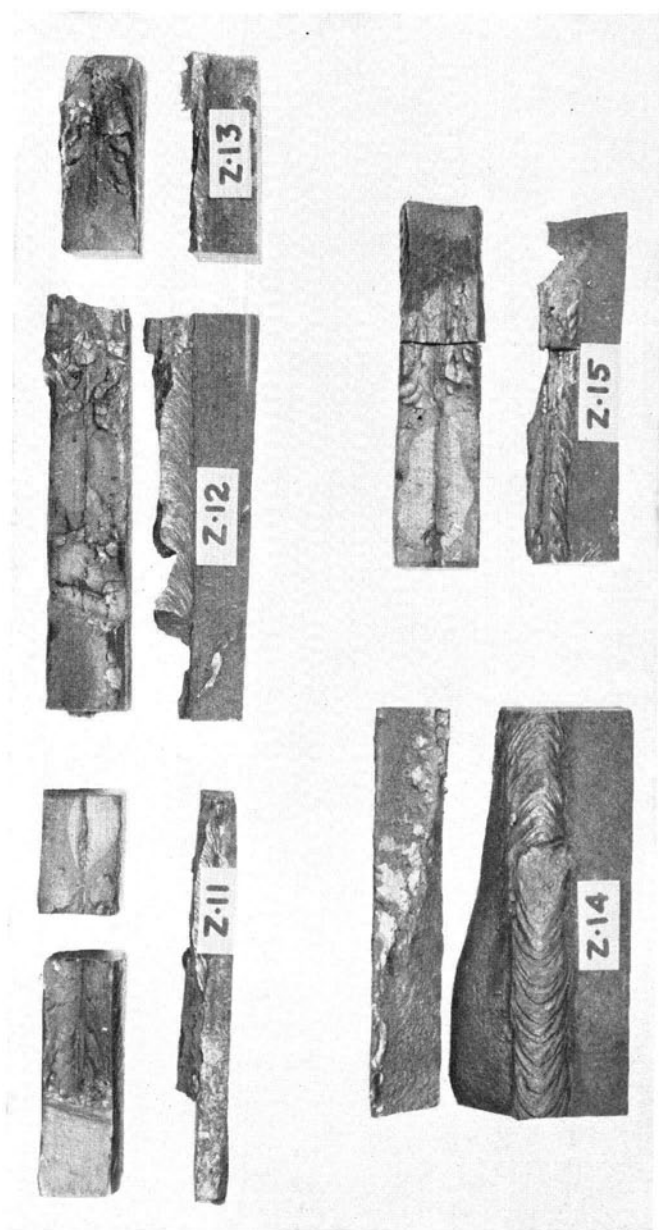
(b). FRACTURES OF THE Z SPECIMENS
